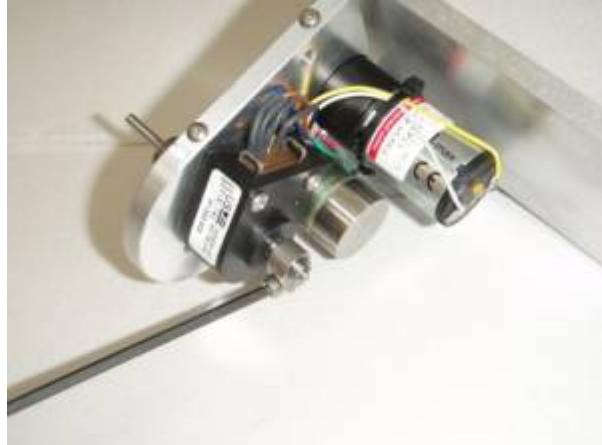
Use the 7/64 inch Allen wrench to loosen the screw on the drive shaft clamp.
